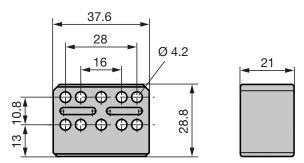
Installation dimensions of BTL6-A-3800-2 magnet
